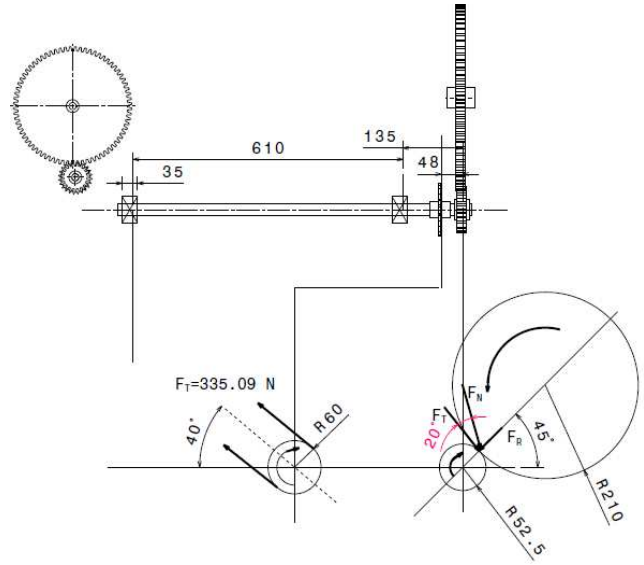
A layout of intermediate shaft (all dimensions in mm).
